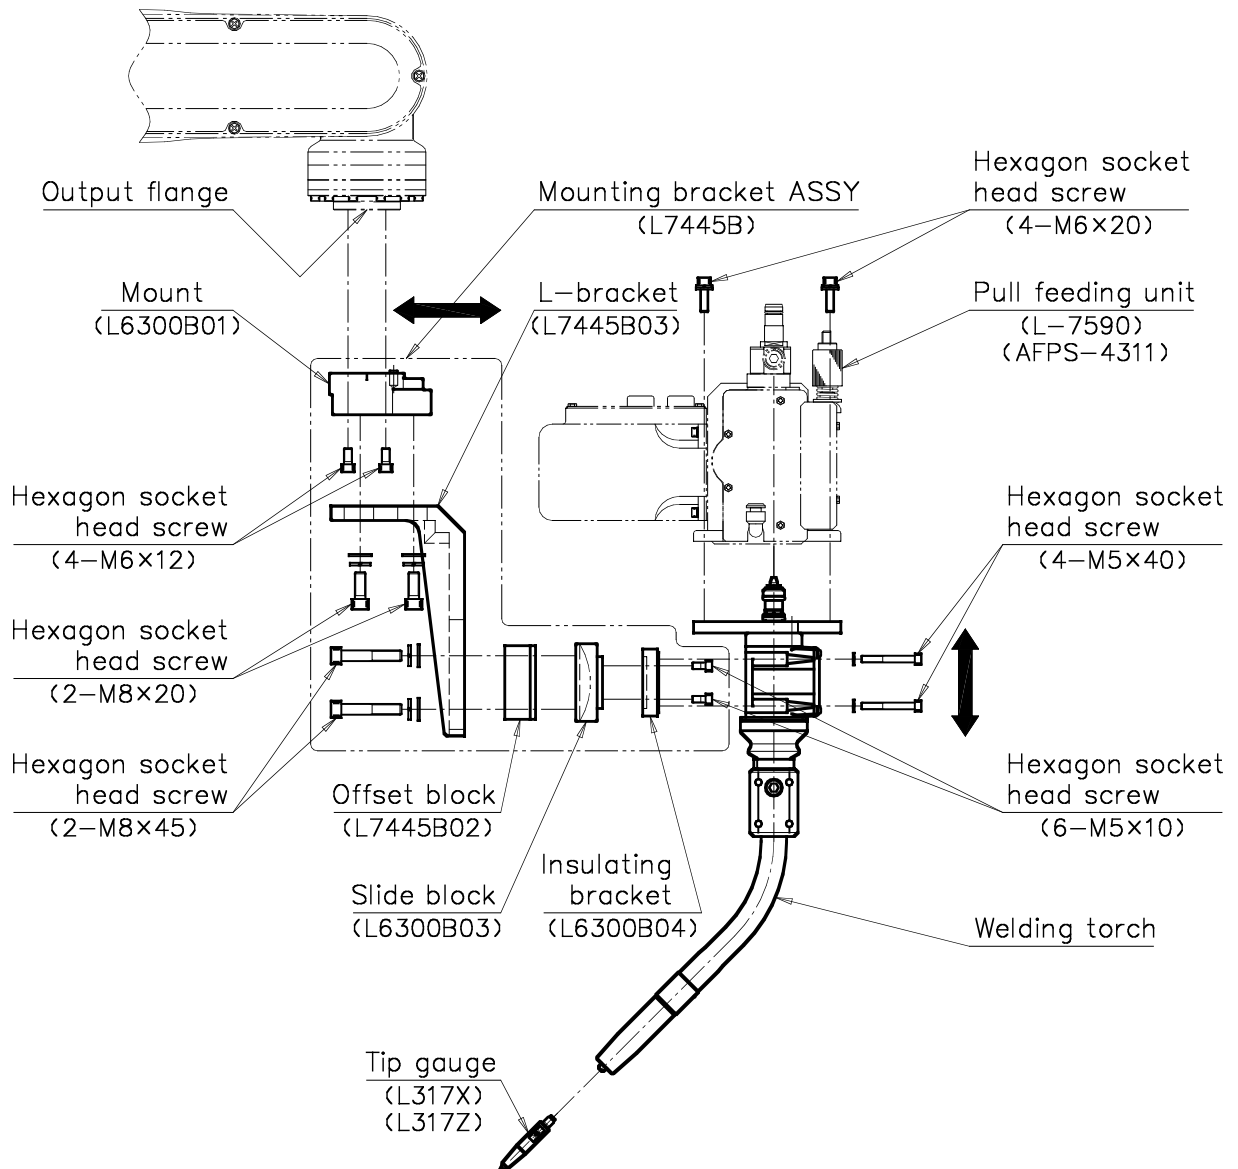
Mounting torch (mounting bracket) and pull feeding unit
